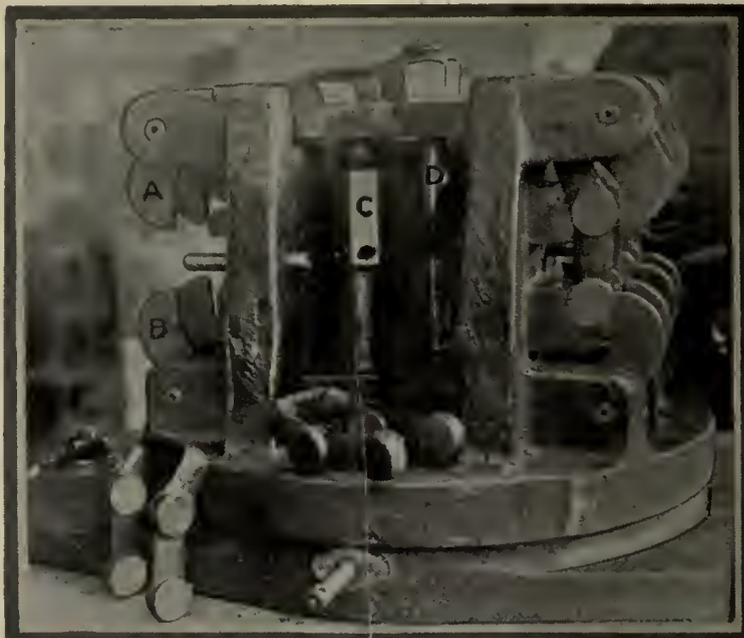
AN INTERESTING JIG USED ON A LINCOLN-BECKER MILLER.
